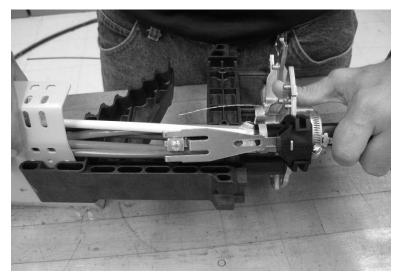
Insert cable attachment bracket into bottom port of metal frame.
